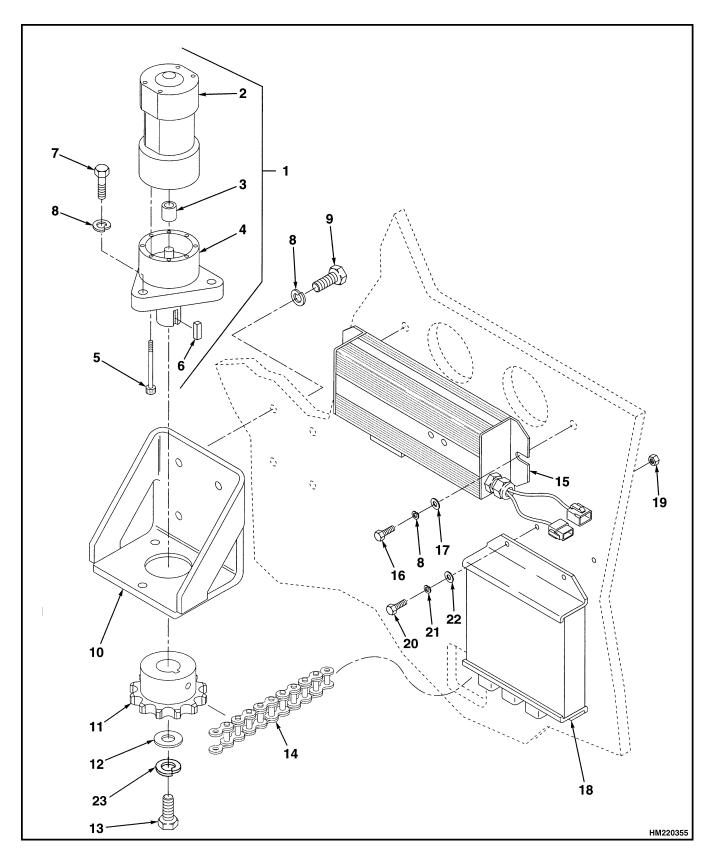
Motor Mounting Assembly (D174 and G118 Only) - APS
